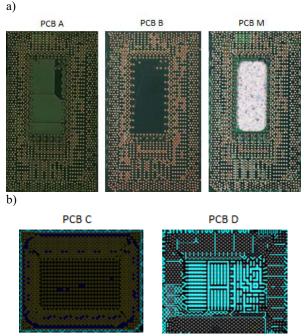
a) Product cavity array FCBGA PCB layout with presence and absence of copper plane in the center b) Product full array FCBGA PCB layout with symmetric and a-symmetric land pattern design.
